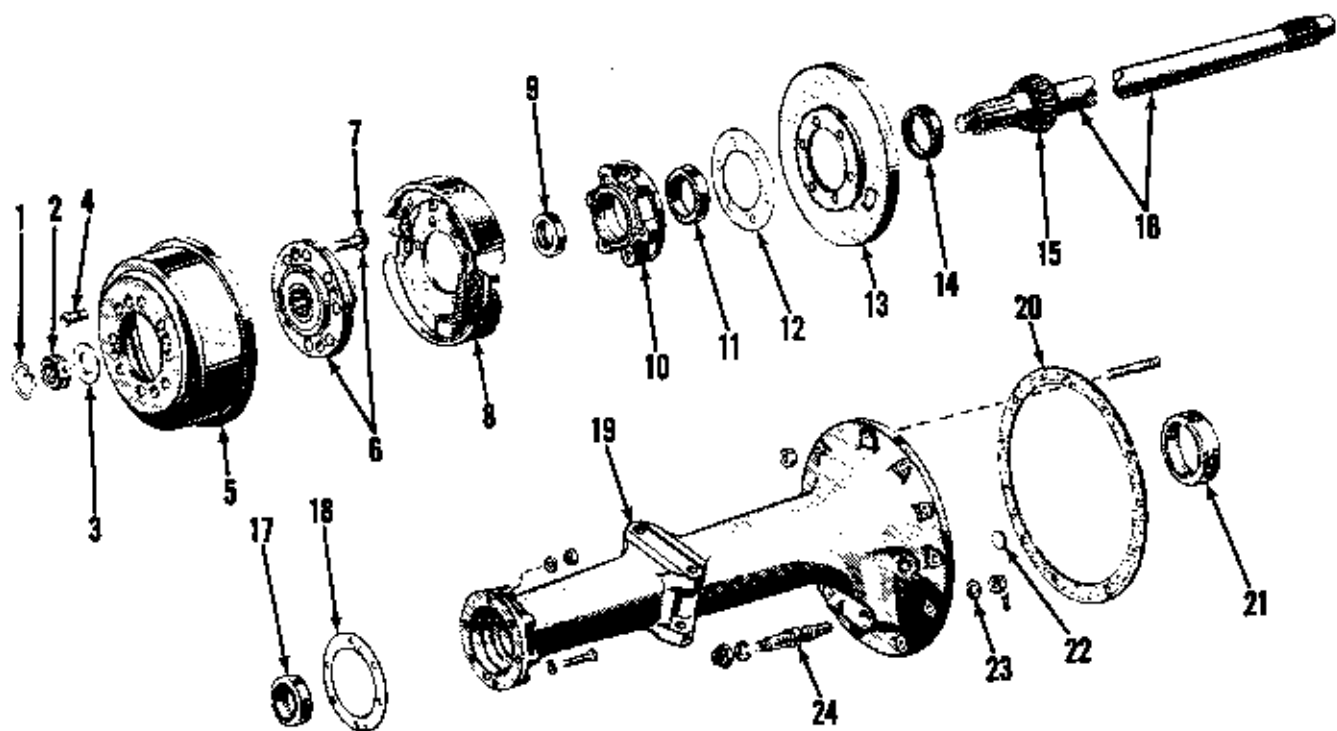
Exploded view of rear axle assembly. Bearing (15) is packed with multi-purpose grease. Seal (17) prevents differential lubricant from diluting grease. Seal (17) seats on rear wheel hub (6) and cork seal (14) is required to seal hub to axle.
